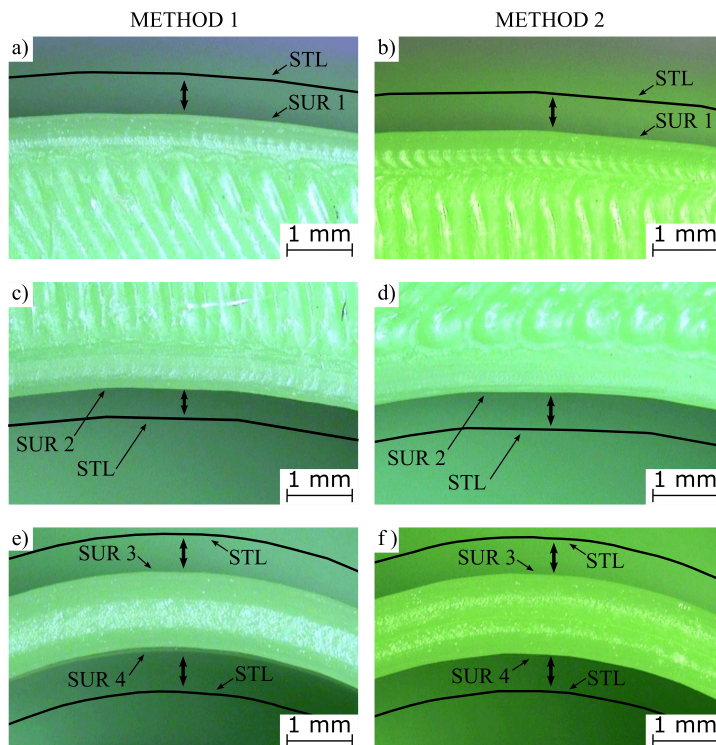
Macroscopic view of the outline of the sample surfaces: a) Method 1, Surface 1; b) Method 2, Surface 1; c) Method 1, Surface 2; d) Method 2, Surface 2; e) Method 1, Surfaces 3 and 4; f) Method 2, Surfaces 3 and 4.
